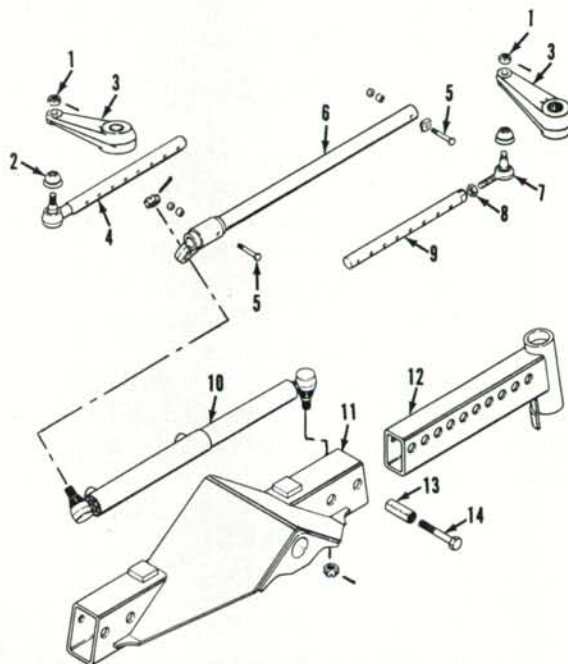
Exploded view of steering tie rod, cylinder, arms and related parts used on two-wheel drive tractors.
